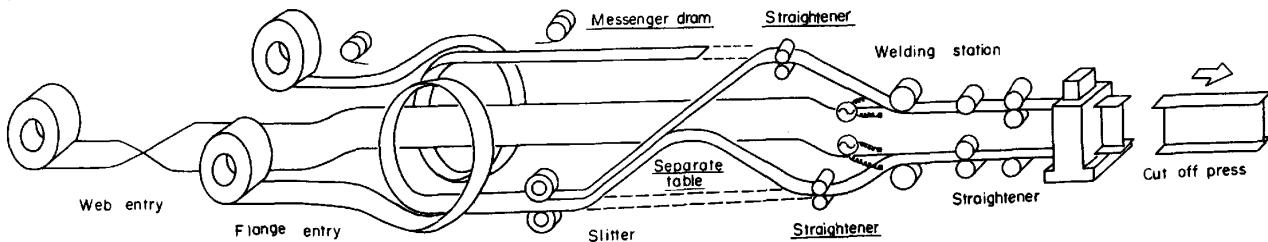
Schematic view of welded H shape mill with inline slitter
